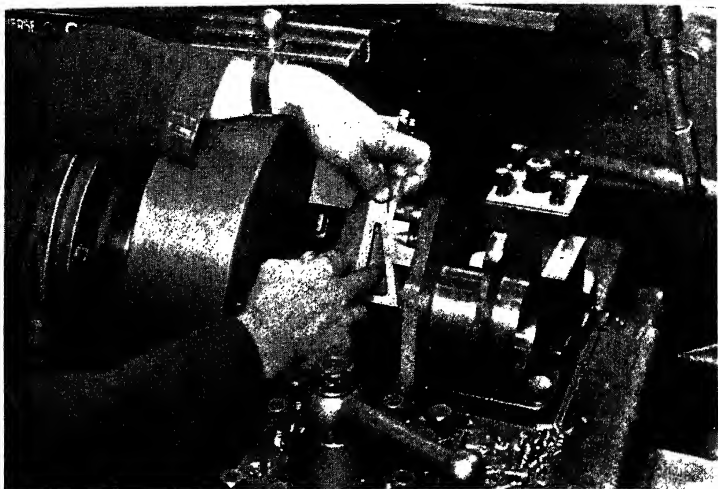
PRODUCTION OF LARGE MACHINED FITTING ON NO. 8 WARD LATHE (7).
